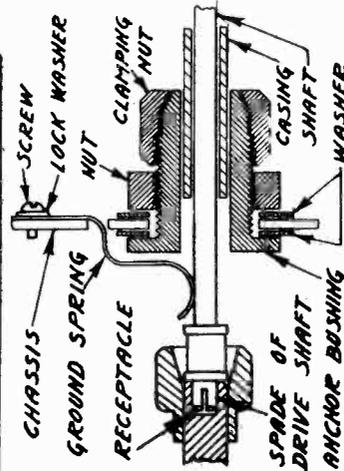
Details of Flexible Shaft Connection at the Chassis
